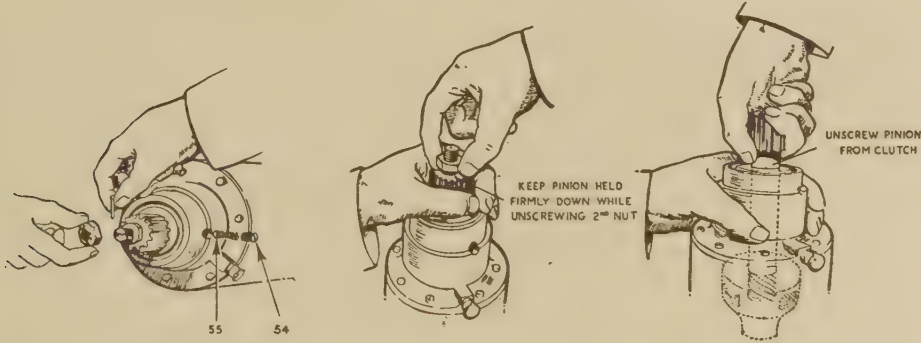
Method of Removing Starter Pinion without Dismantling Starter Motor.
